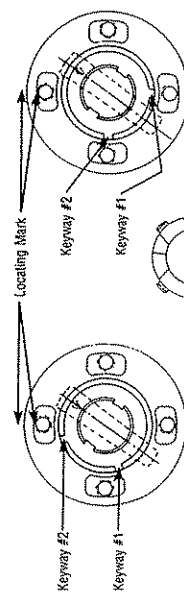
(REAR VIEW) 2 Position Spring Return to Right 2 and 4 Position Maintained
